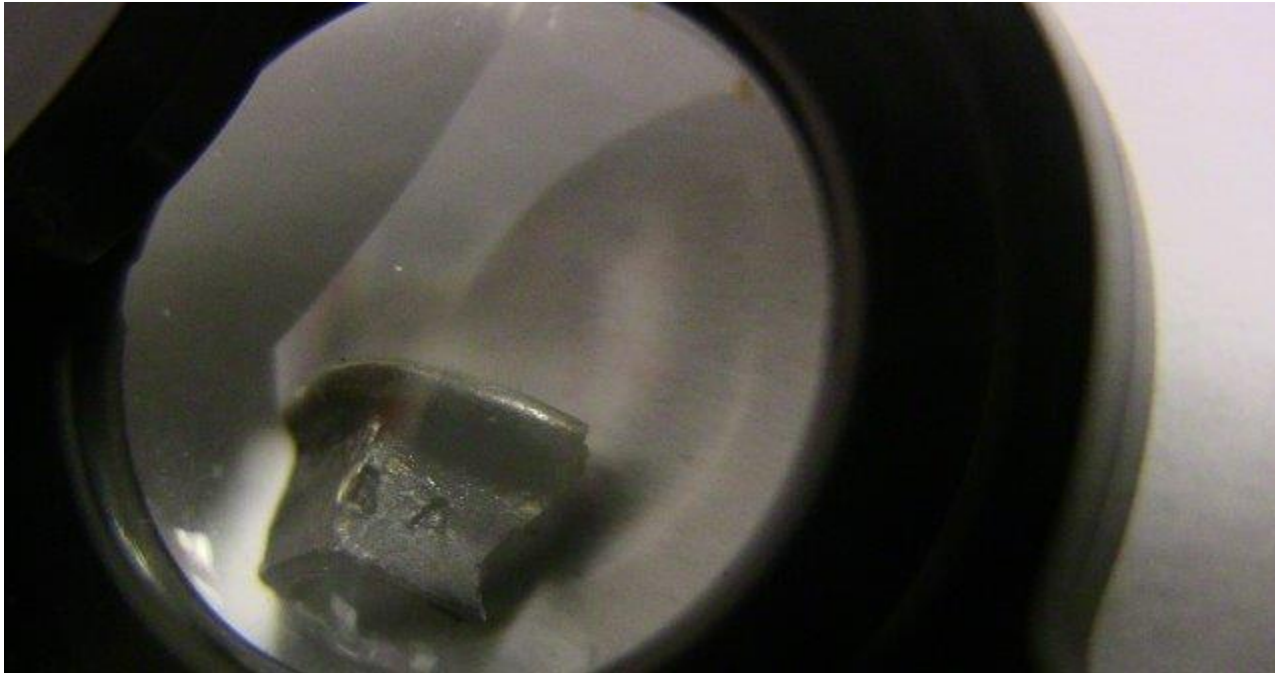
Cracked nut with markings "A A" viewed through magnifying glass
